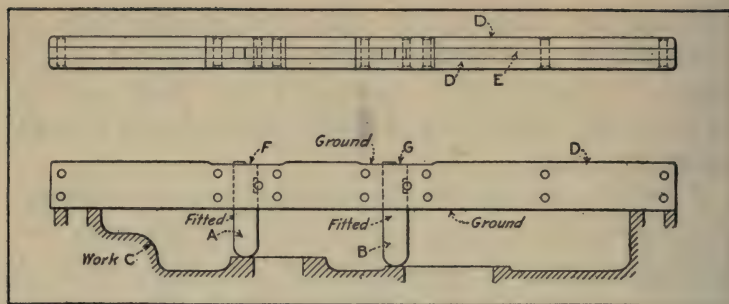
DOUBLE FLUSH-PIN GAUGE
